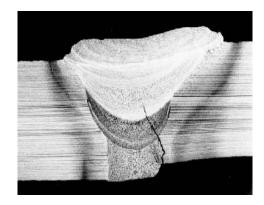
Cracked Weld (by P H M Hart, "Courtesy of TWI Ltd")
